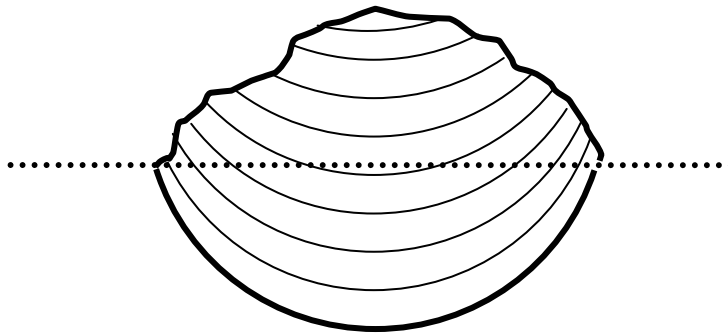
Natural edge burl blanks yield more pieces if the blank is domed.
